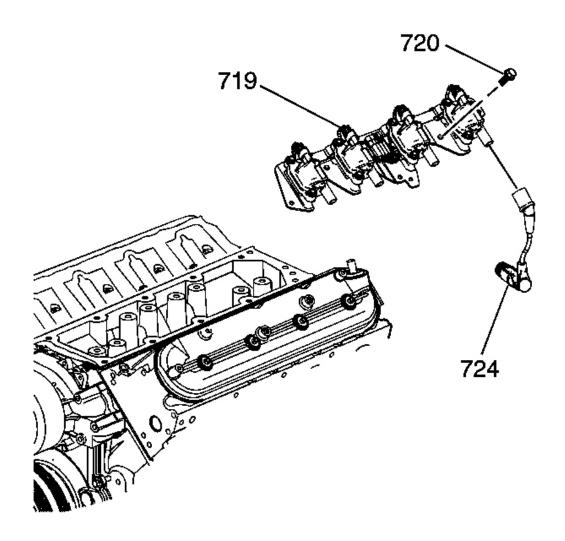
Ignition Coils & Bracket Courtesy of GENERAL MOTORS CORP.
